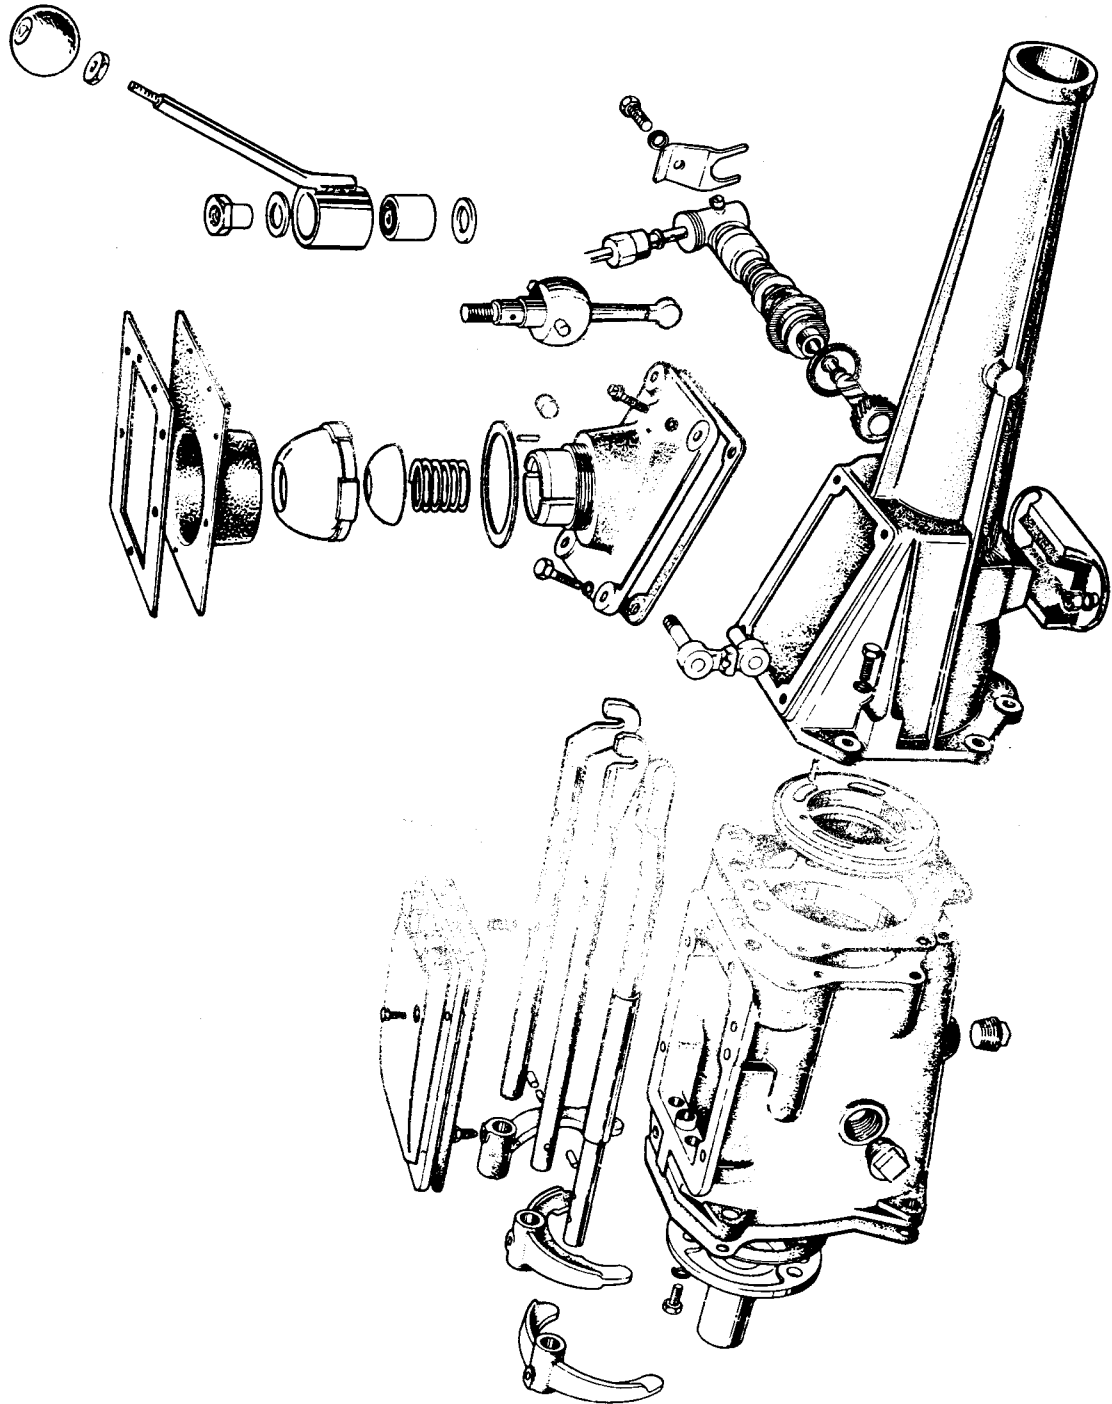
GEARBOX EXTERNAL COMPONENTS
